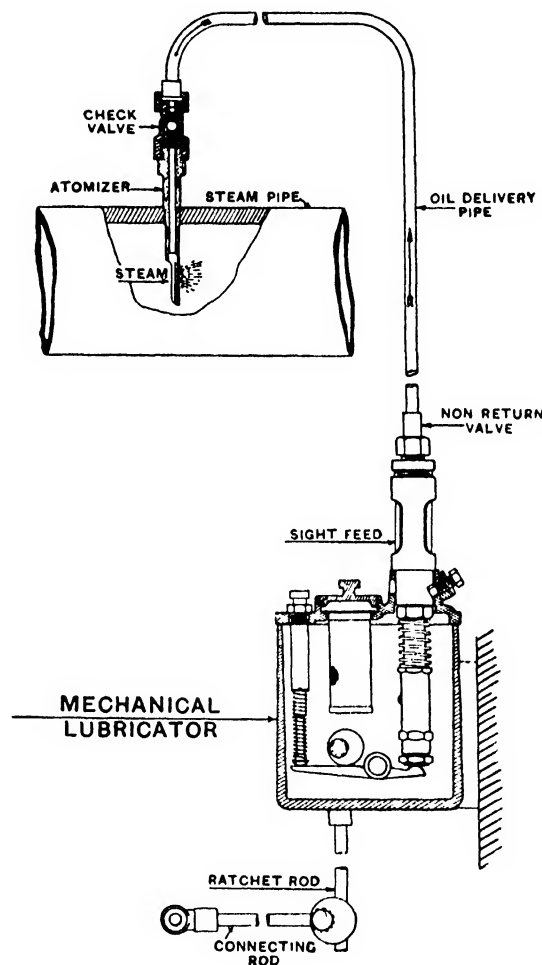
Diagram showing a mechanical lubricator arranged to feed oil through a check valve and atomizer into a steam pipe. (Courtesy Vacuum Oil Company Ltd.)
